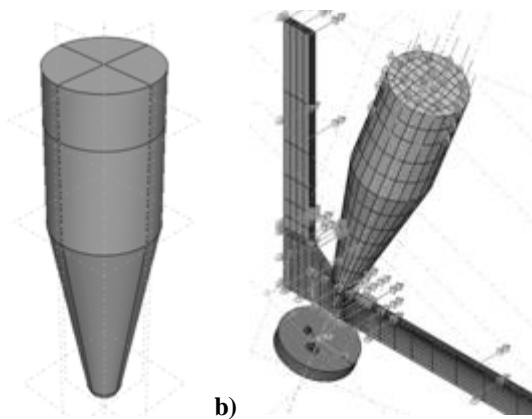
FEA hammer peening tool; a) model only; b) full assembly
